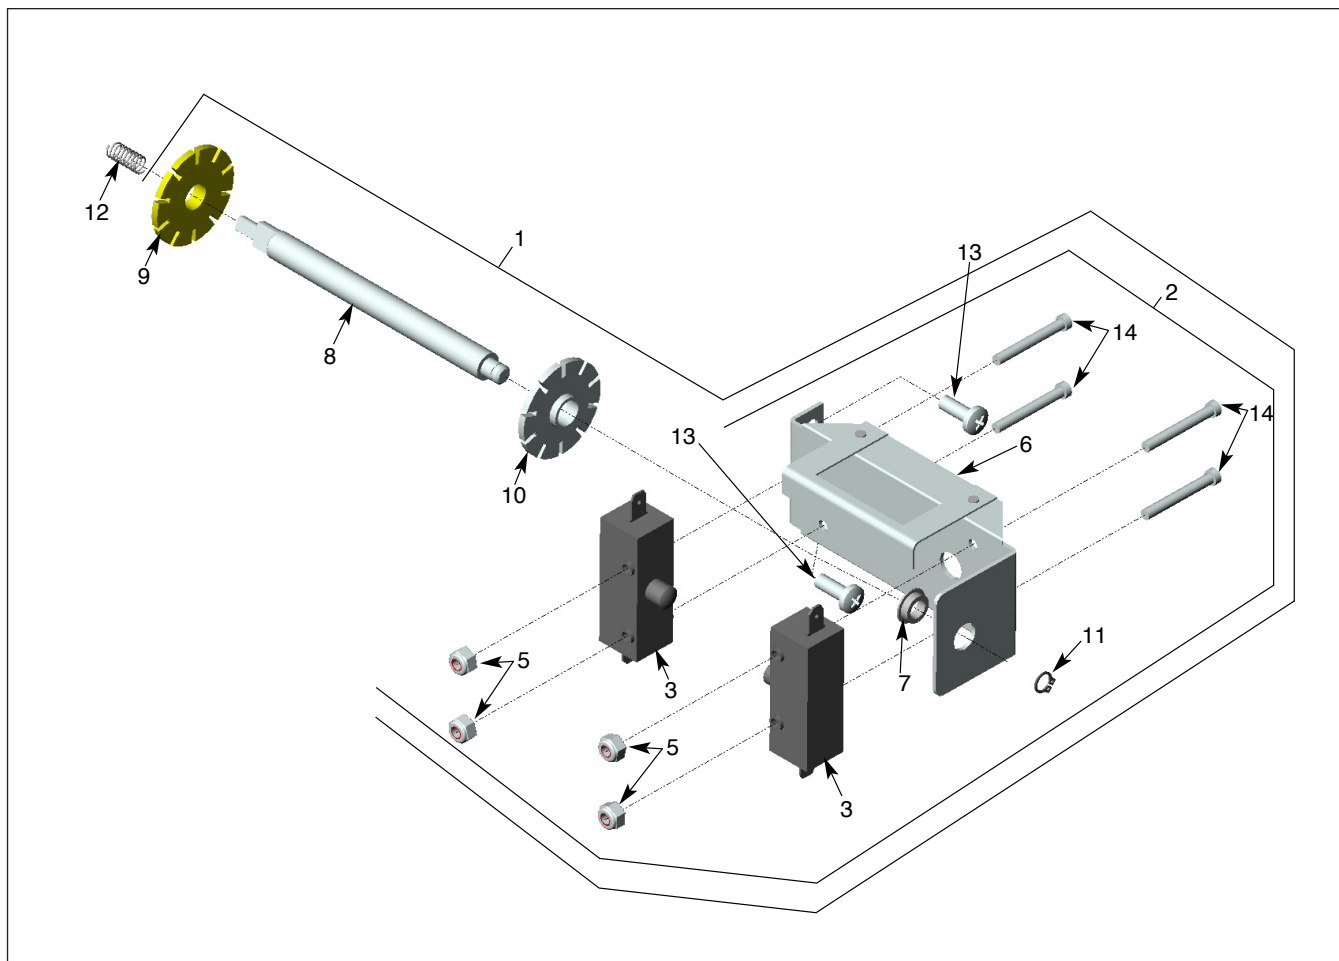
A PARTS LIST FOR LIMIT SWITCH ASSEMBLY
